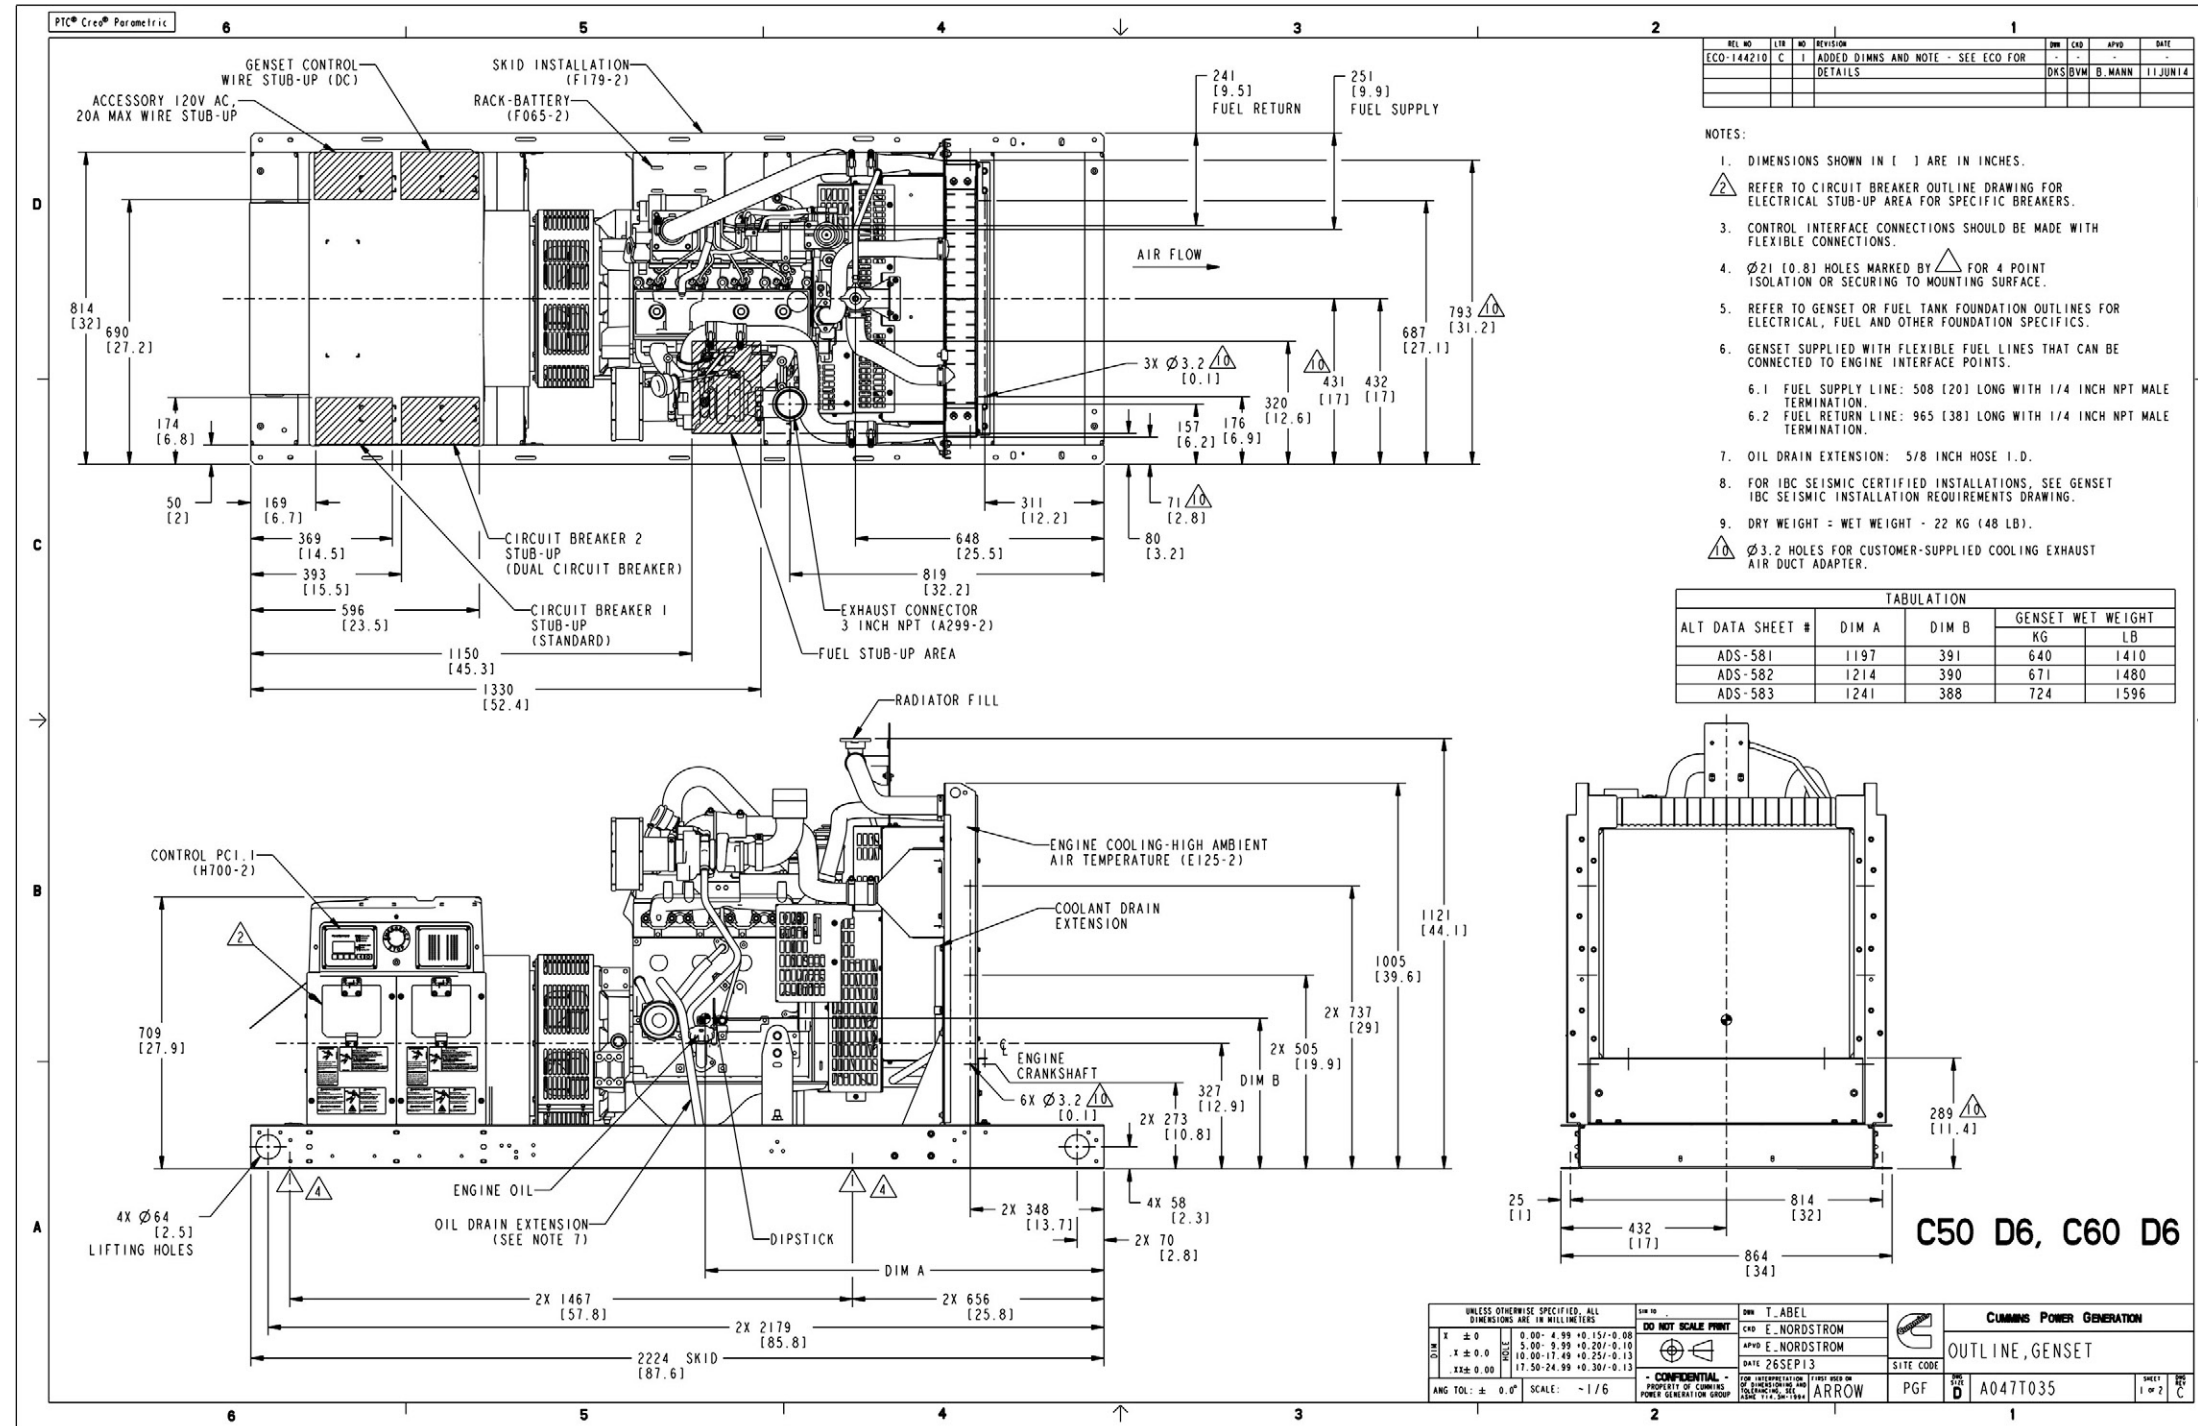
GENERATOR SET OUTLINE, OPEN (50 AND 60 KW) (SHEET 1 OF 2)
